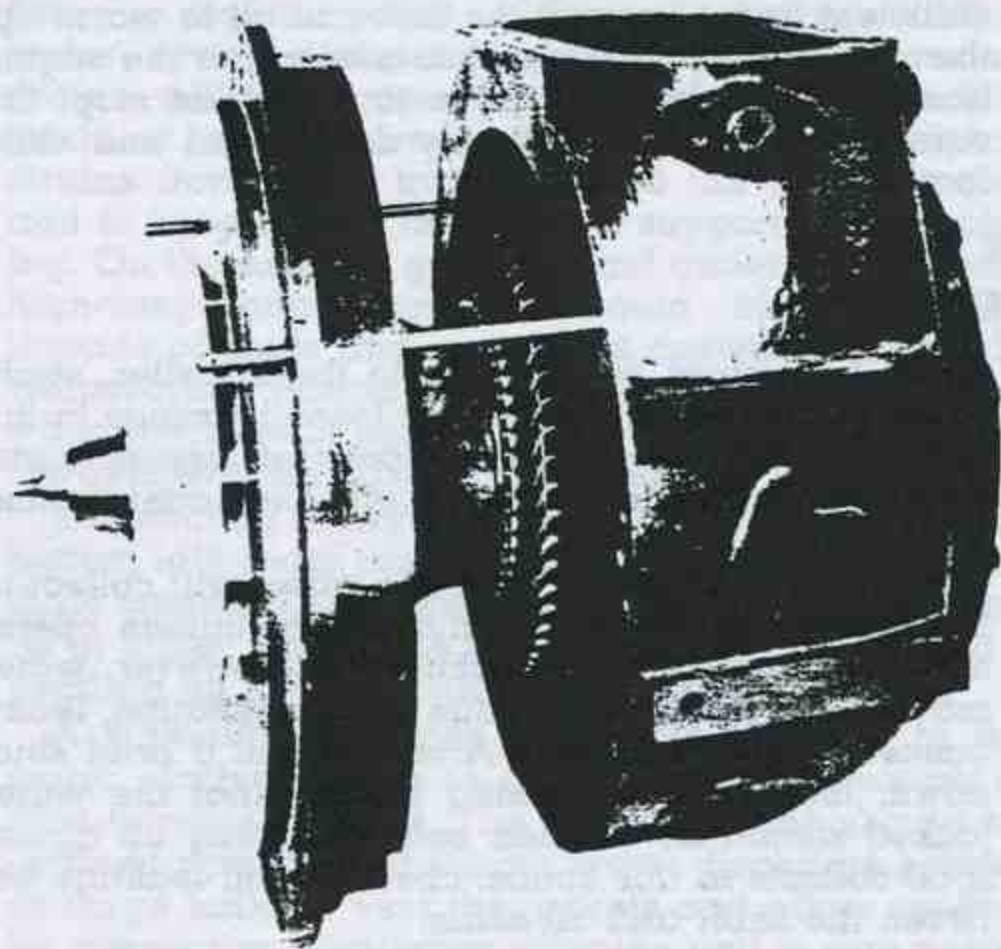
Intermediate and Turbine Casing—Method of Assembly and Disassembly.
